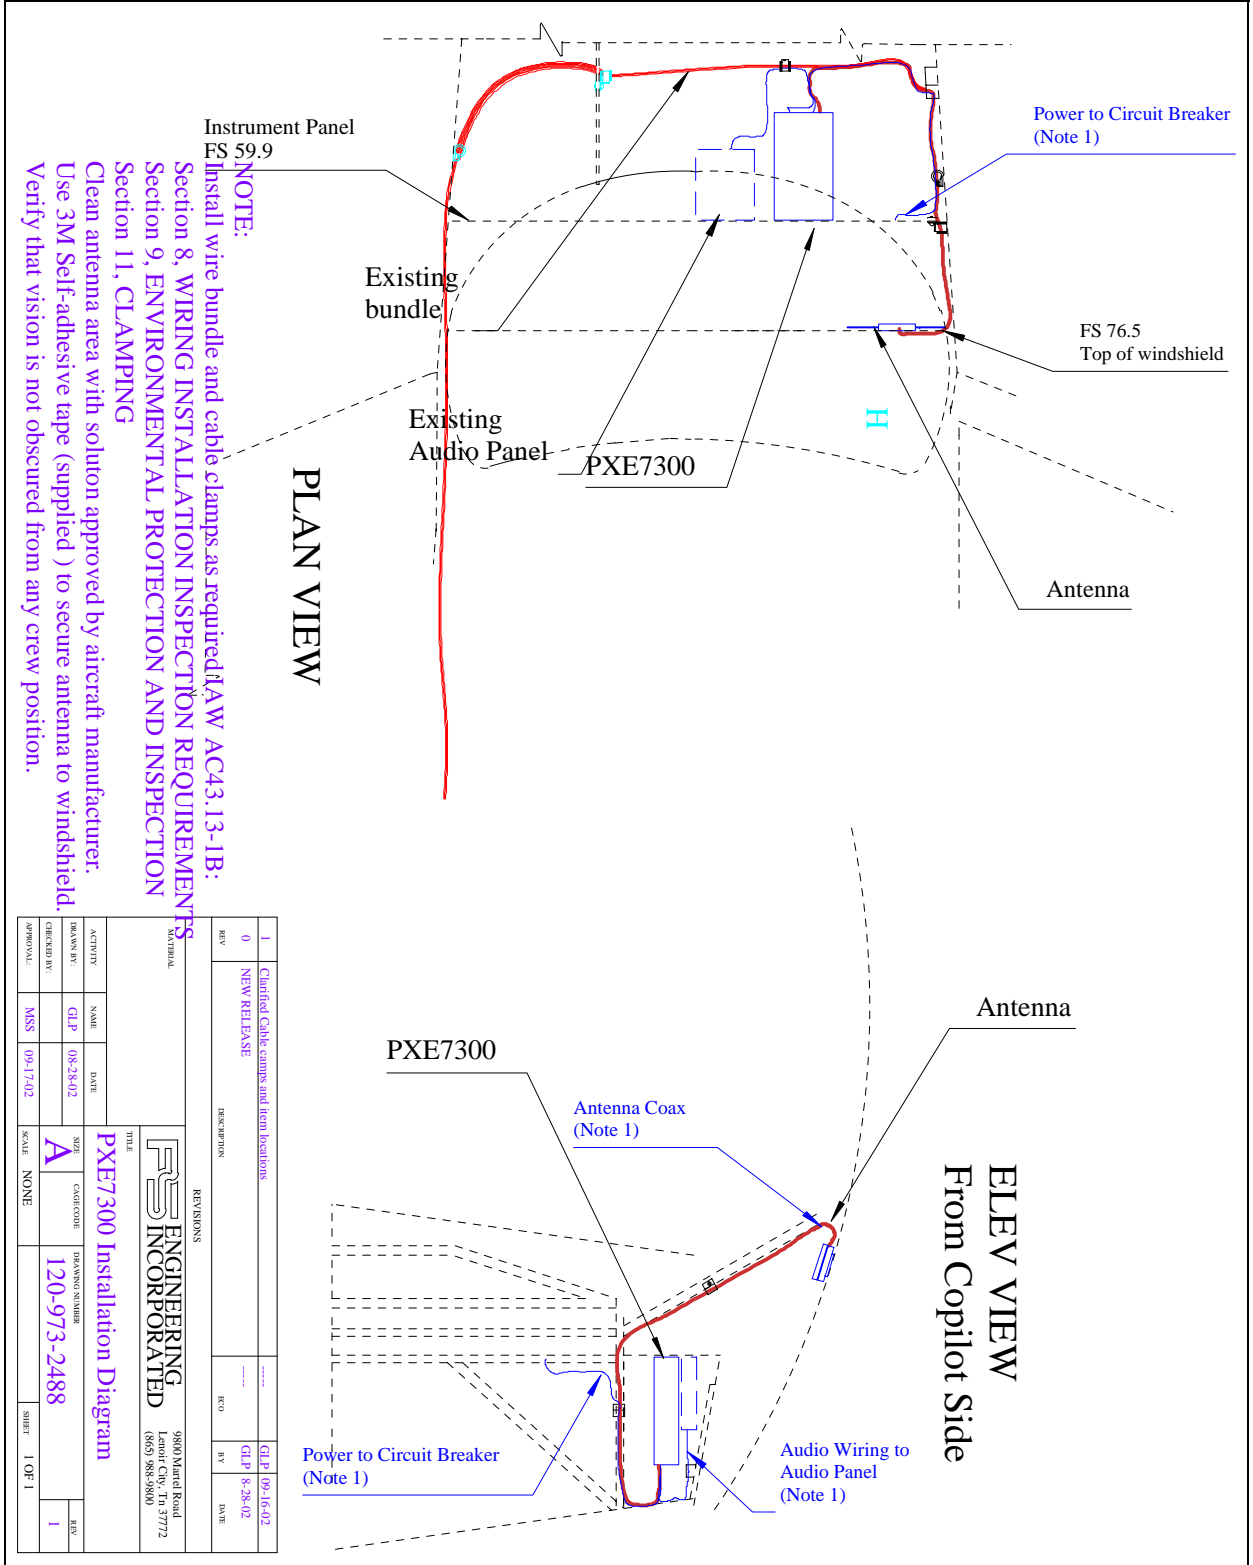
PXE7300 Installation Diagram (Typical) 120-973-2488
